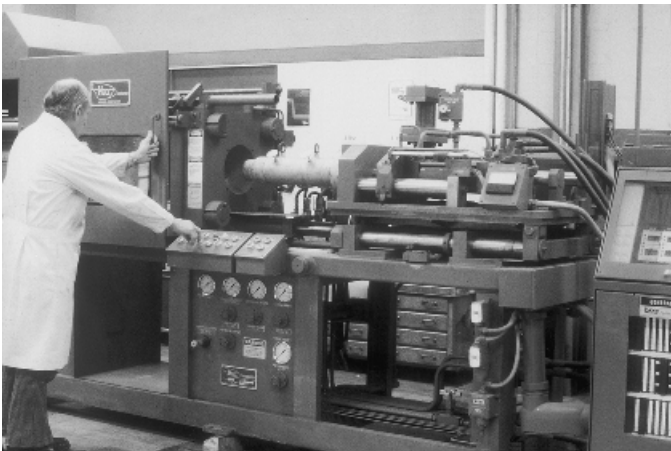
Injection molding press for molding thermoset plastics.
